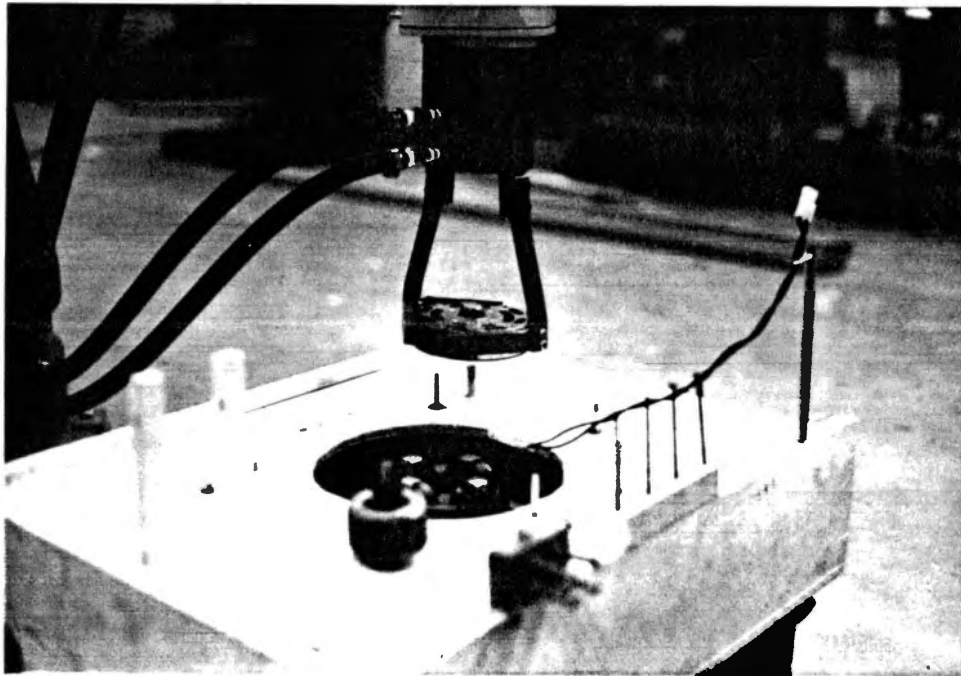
Robot Lifting End Bell from Fixture Locator Pins
